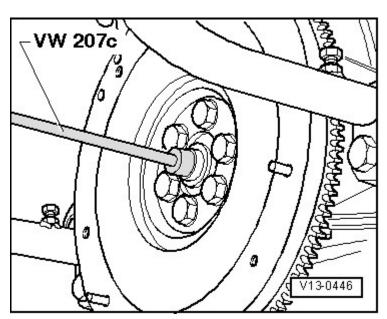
Driving In Needle Bearing Using Drift VW 207 C Courtesy of AUDI OF AMERICA, LLC
